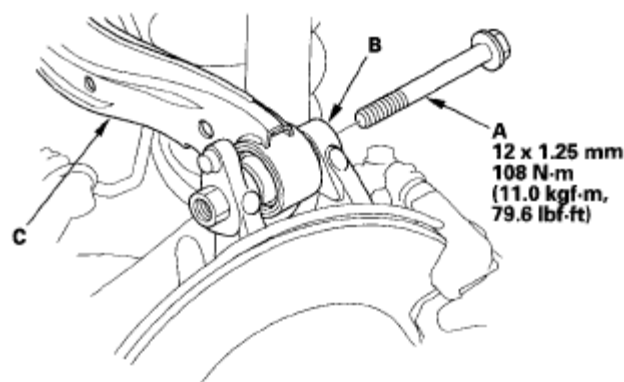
Identifying Flange Bolt (With Torque Specifications)
